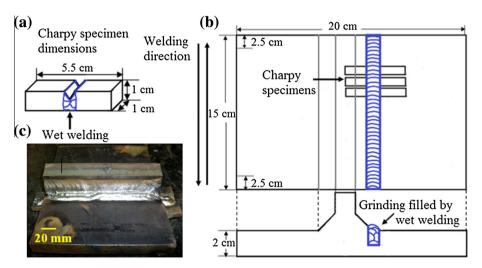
T-welded connection, (a) Charpy specimen dimensions, (b) dimensions and (c) wet welding.
